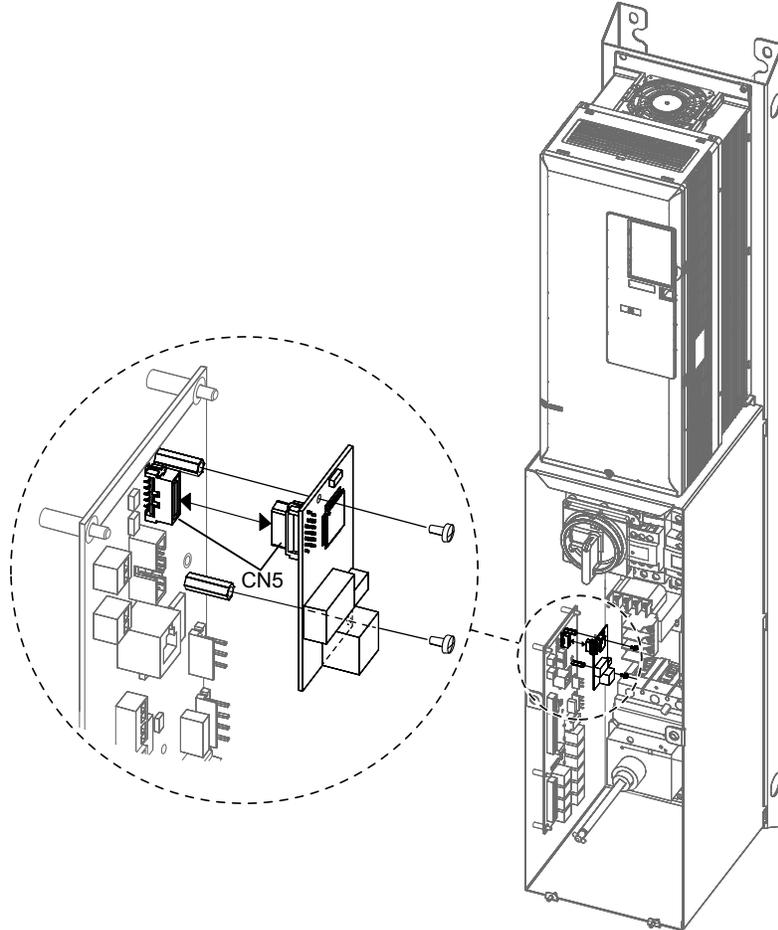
Insert Option into Bypass PCB CN5 Connector Port - Model Z1B1D002
